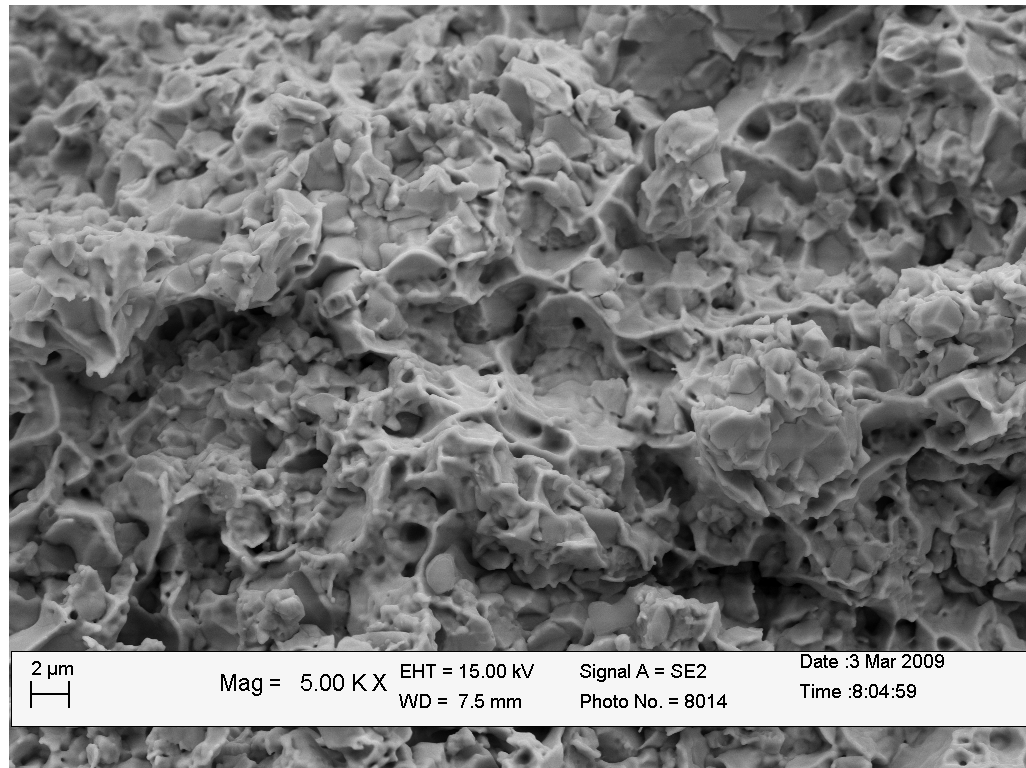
The fracture surface of the Mo-2Si-1B wt.% alloy tested at 1200°C.
